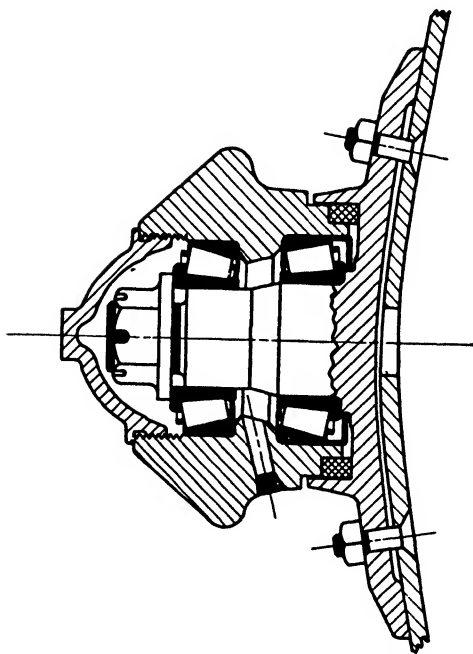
Roller bearing for disk-plow bottom. (*Timken Roller Bearing Company.*)
